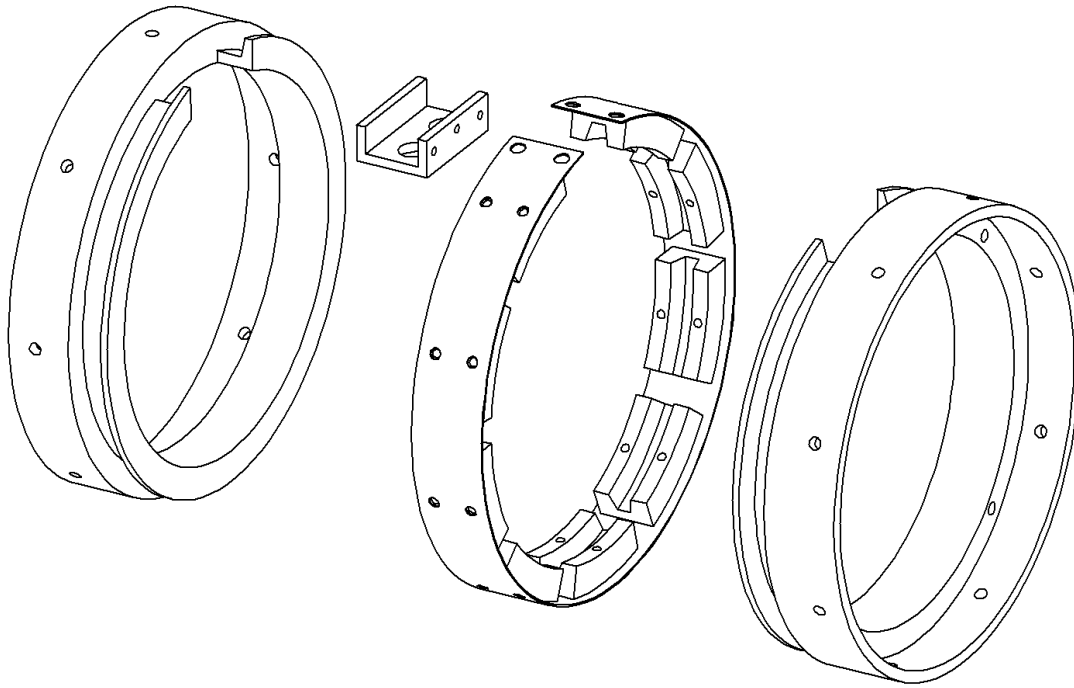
Exploded view of initial mechanical staging design, from left to right: lower flange, clocking block, clamp band assembly, upper flange.
